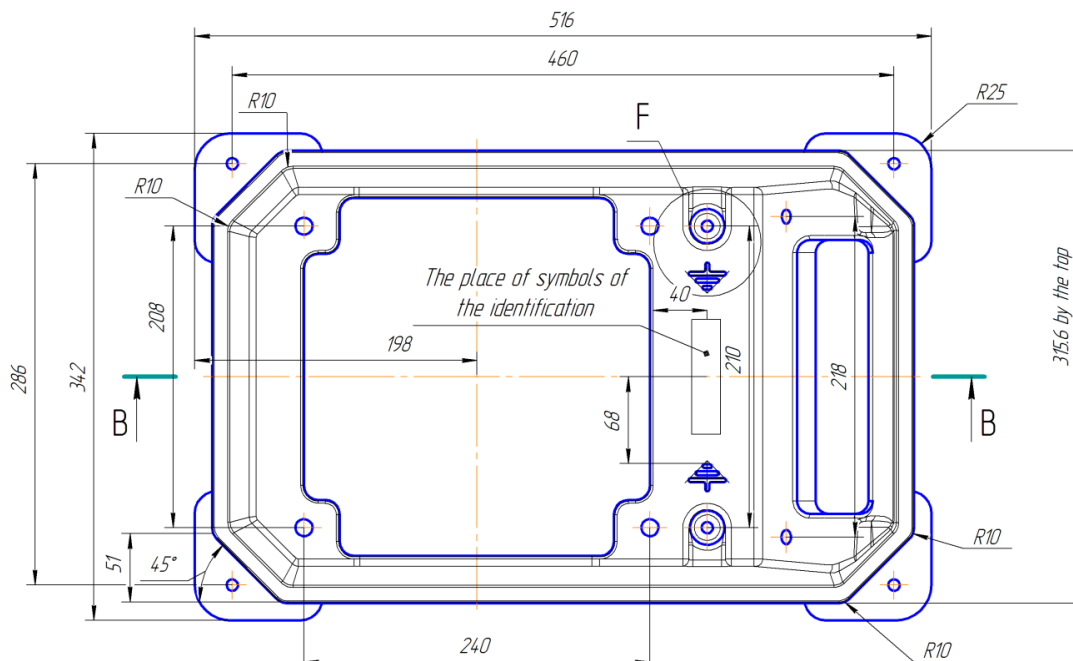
The drawing of the part «Frame of the terminal box 5AMN 315». Top view.
